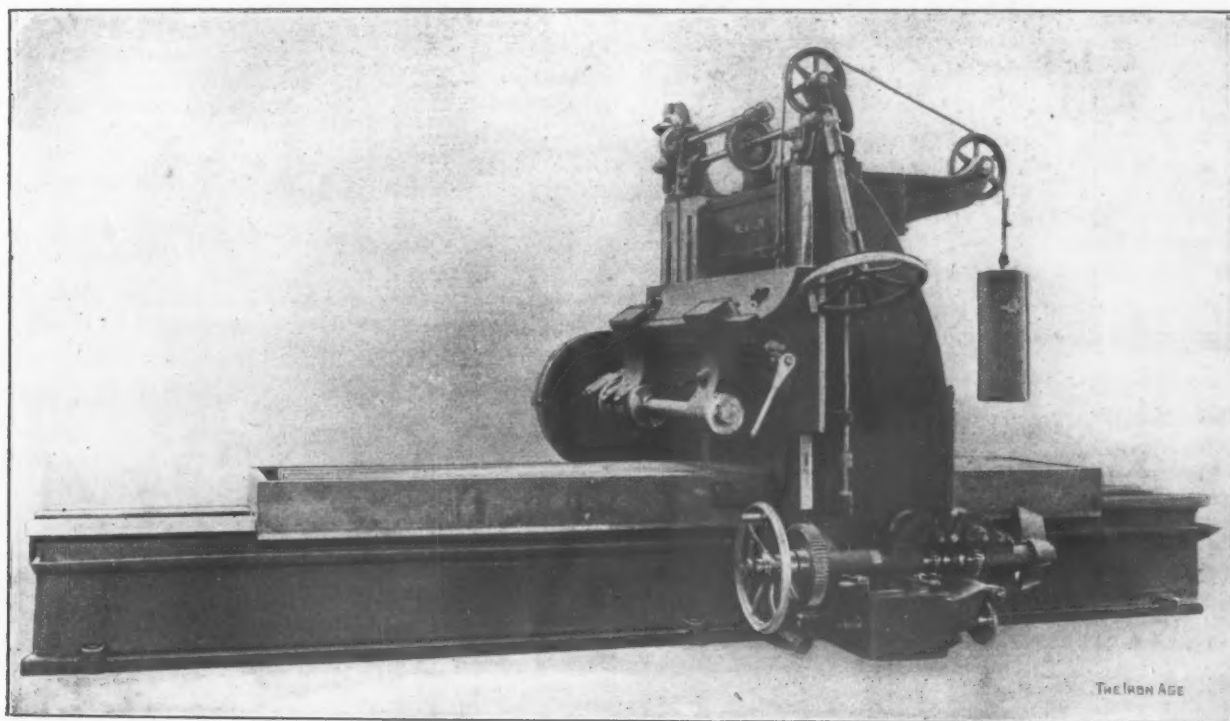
View of the Operating Side of the Newton Heavy Slab Milling Machine.
